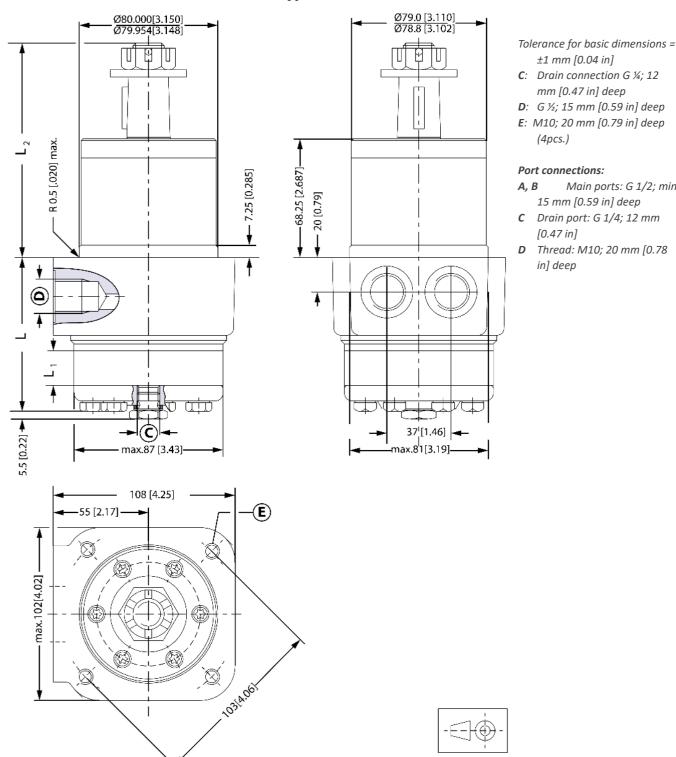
OMPW and OMPW N motors wheel type (EU version)
